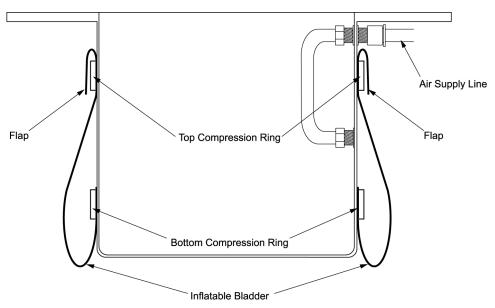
Section View of Open Mouth Bag Spout and Inflatable Bladder
